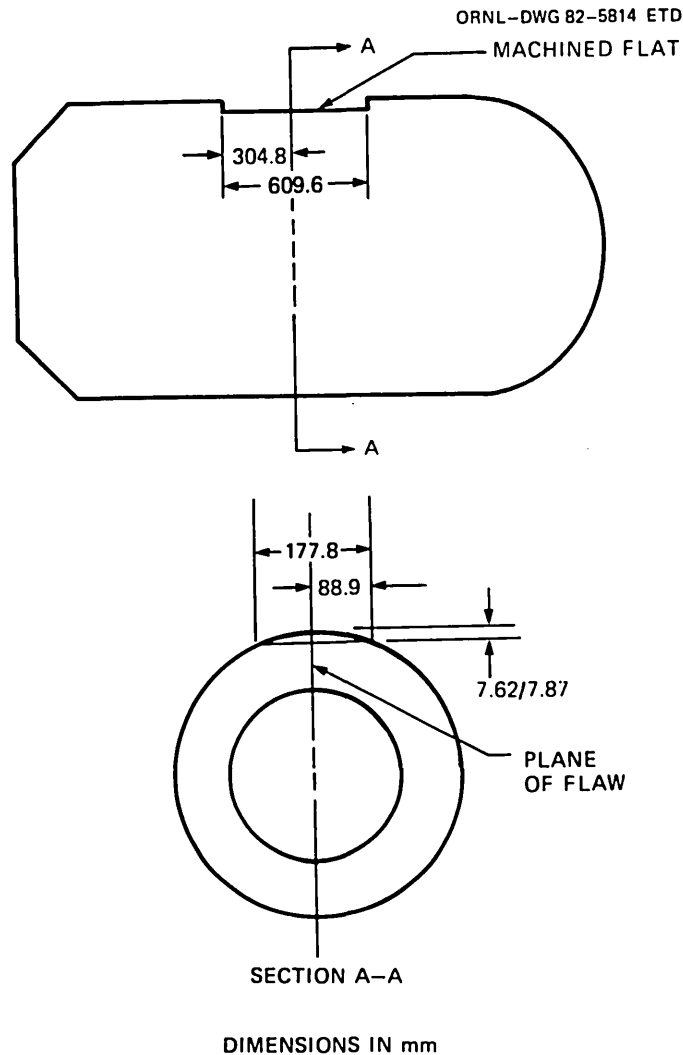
Dimensions of machined flat at flaw site in vessel V-8A.
